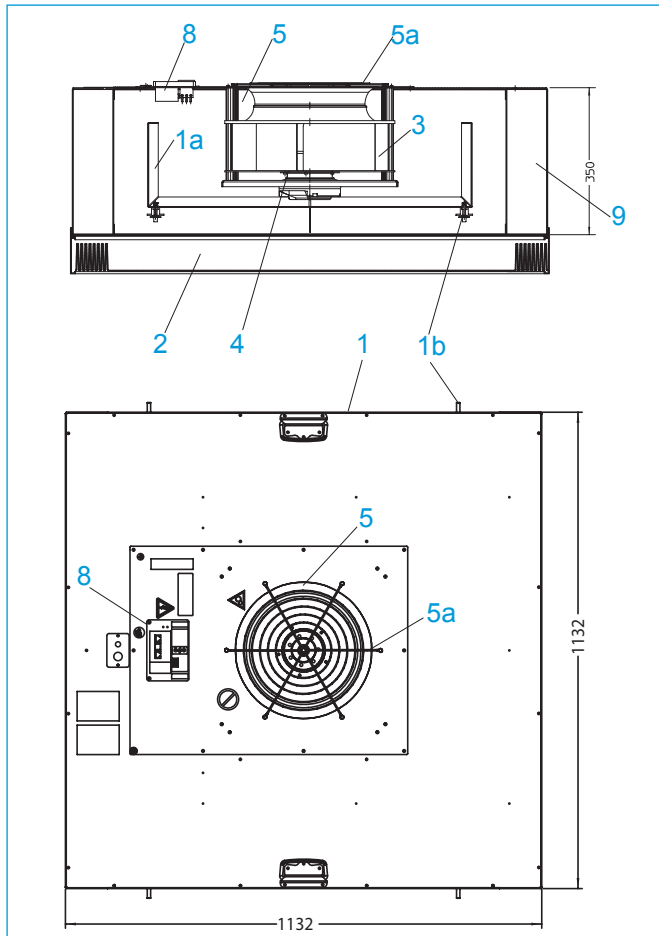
FFU-ECO 2-1212, with locking bolts 1b for the cleanroom side installation into Exyte Technology ceiling grid UFR 55/70-T with bearing rails.
